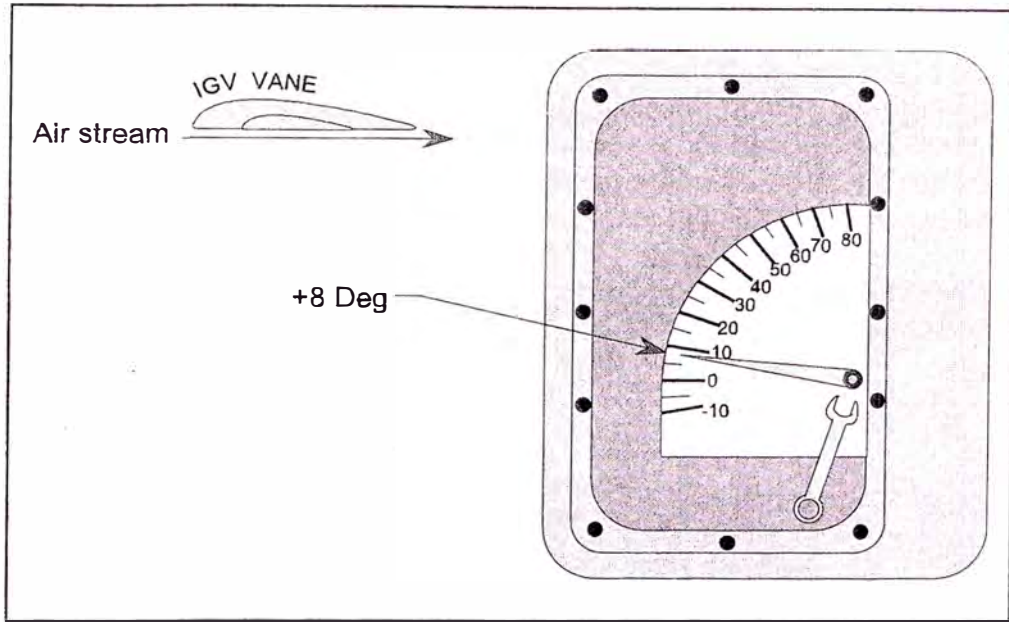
Vane angle indicator Adjusting actuator travel.
